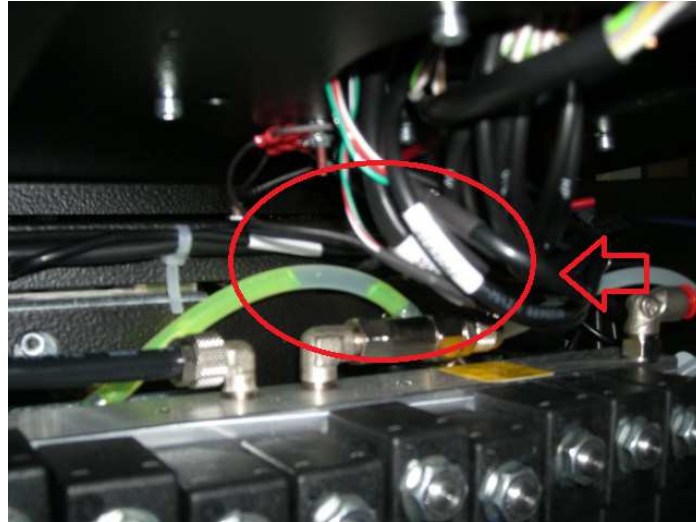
Possible contact between the cables coming from the rotating head and the silicone tube which connects the manifold to the bottle
